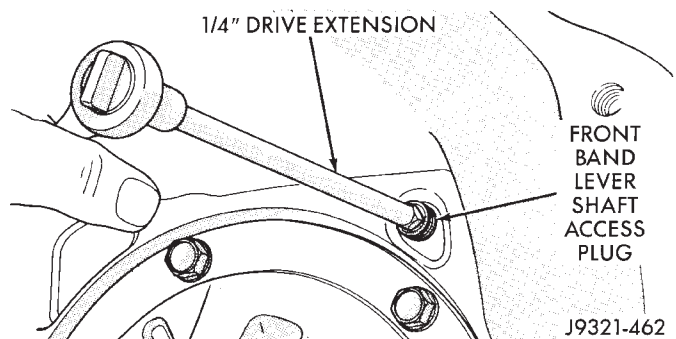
Removing/Installing Front Band Lever Shaft Access Plug
